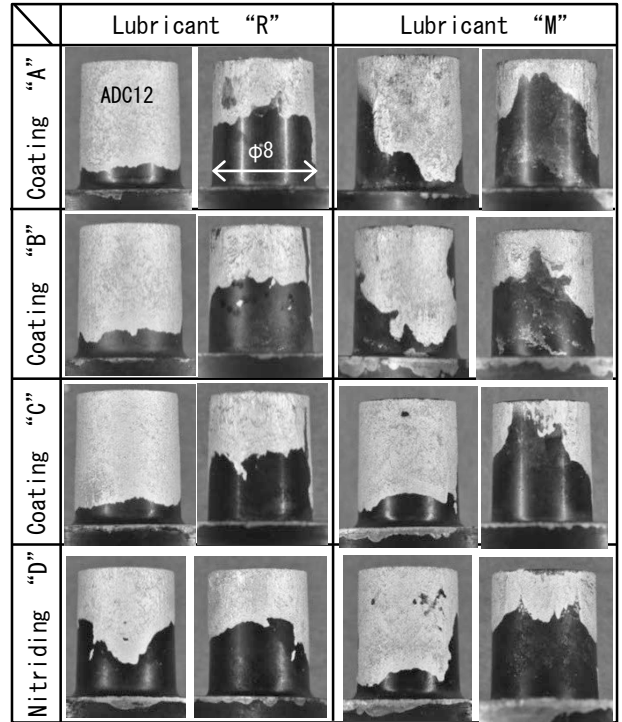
Appearance of coated core-pins after 18 shots. The geometry of a pin is 8 mm diameter with 10 mm height. Severe soldered parts and the most slightly soldered part around a pin are shown.
